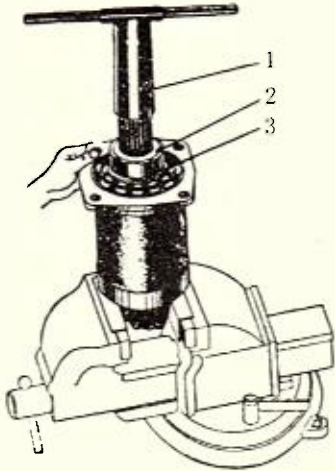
16 Adjustment of driving spiral bevel gear bearing
